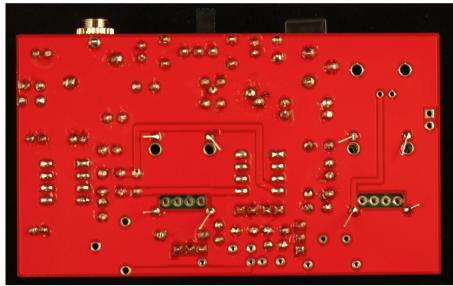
Four Corner Wires on Back Side - Soldered
